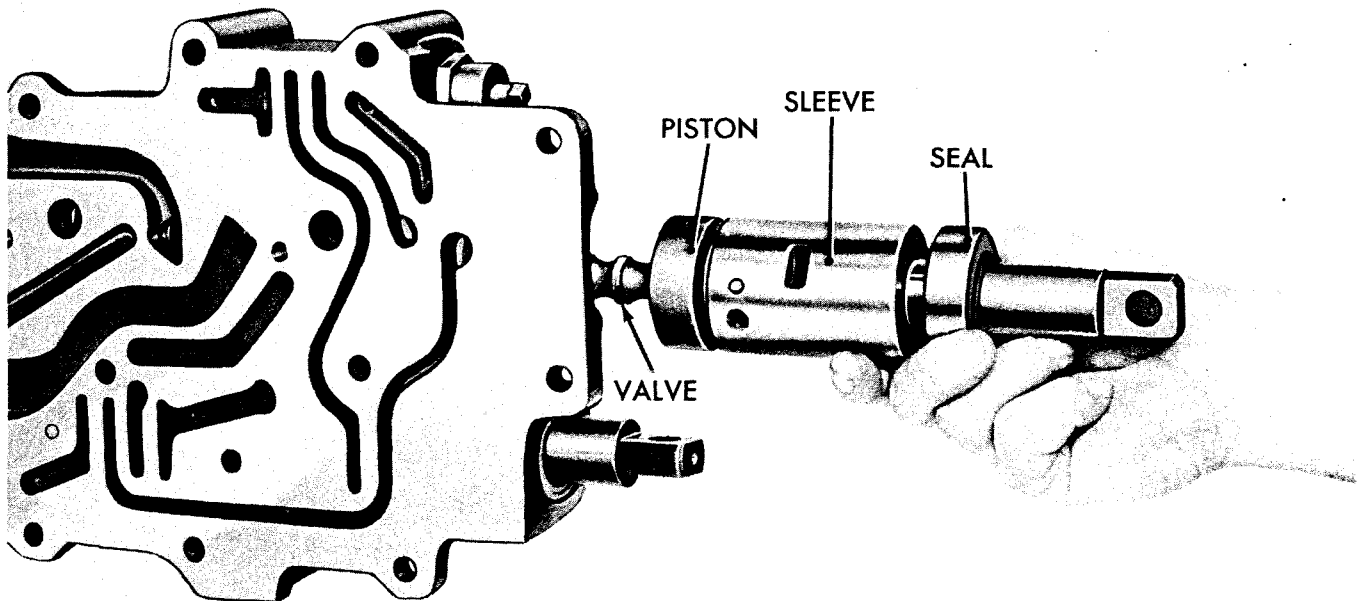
Removing or installing forward and reverse valve, seal, forward shift sleeve, and forward-and-reverse-valve piston
